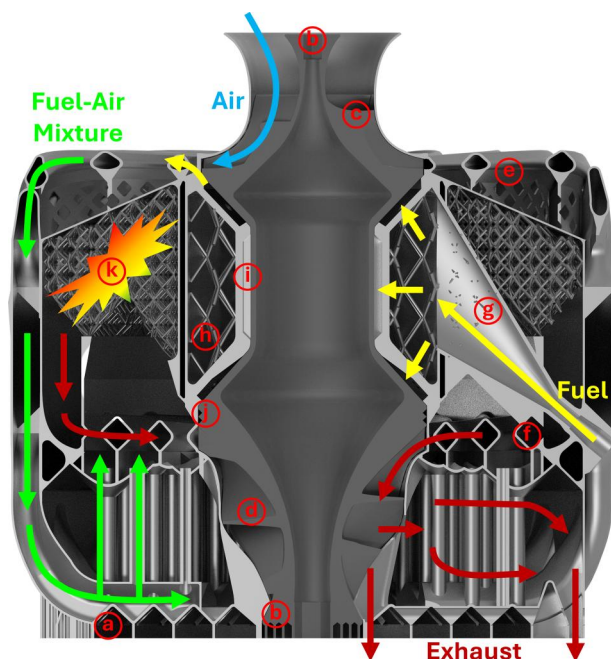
Pre-assembled additively manufactured micro gas turbine layout: (a) external sacrificial structure, (b) balancing masses, (c) radial compressor impeller, (d) mixed flow turbine wheel, (e) fish tailpipe diffuser, (f) diamond-shaped turbine guide vanes, (g) funnel-shaped fuel pipe, (h) high pressure fuel manifold, (i) liquid hybrid bearing, (j) labyrinth sealing, and (k) porous media combustor
